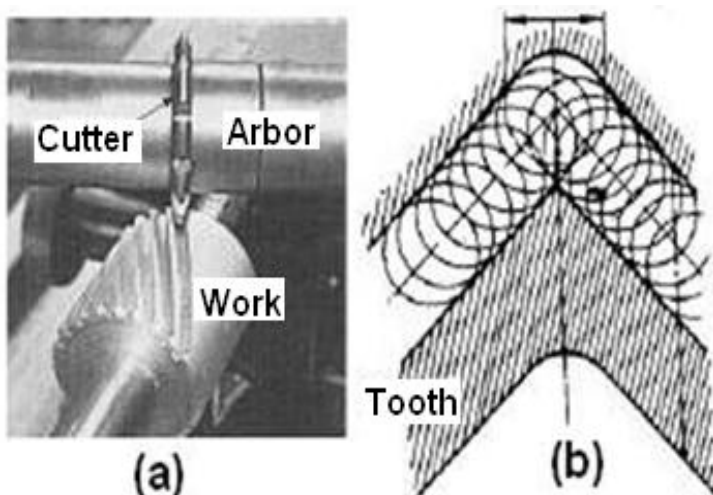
Producing external teeth by form milling cutters (a) single helical and (b) double helical teeth
